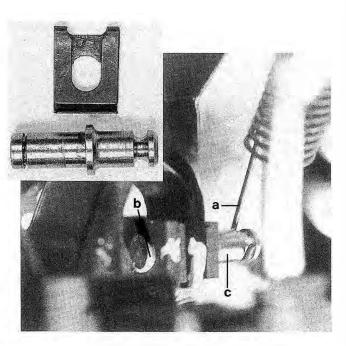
Brake pedal return spring (a), retaining clip (b) and clevis pin (c) as viewed from inside passenger compartment. Inset shows removed clevis pin and clip.
